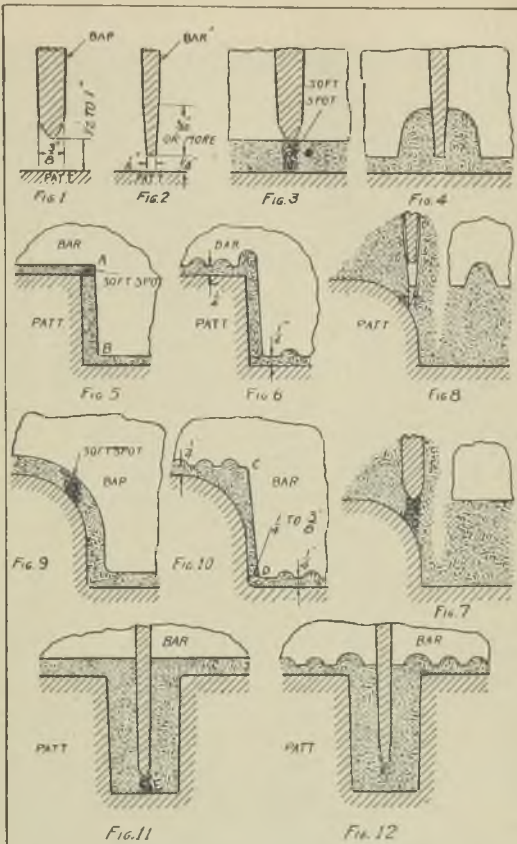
PROPER AND IMPROPER DESIGN OF FLASK BAR FOR JOLT MACHINE RAMMING.
